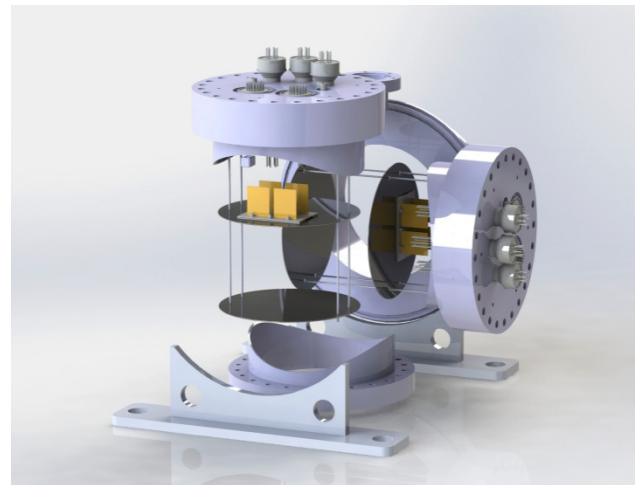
Assembly drawing of MCP-based profilometers mounted on vacuum flanges.
